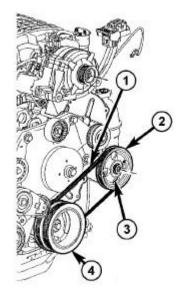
Damper, Bolt & Holder Courtesy of CHRYSLER LLC
